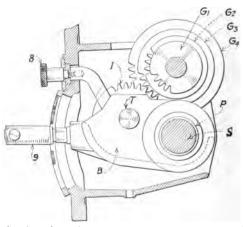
Section through tumbler gear unit, Brown & Sharpe milling machine. P is the driving pinion (see Fig. 145). The swinging frame 7 carrying the intermediate gear I (tumbler gear) is moved up or down by the handle (9). The handle (8) serves to move the frame B to bring the geal I under any one of the gears G_1 , G_2 , G_3 or G_4 as desired and also serves to lock the frame in position.
